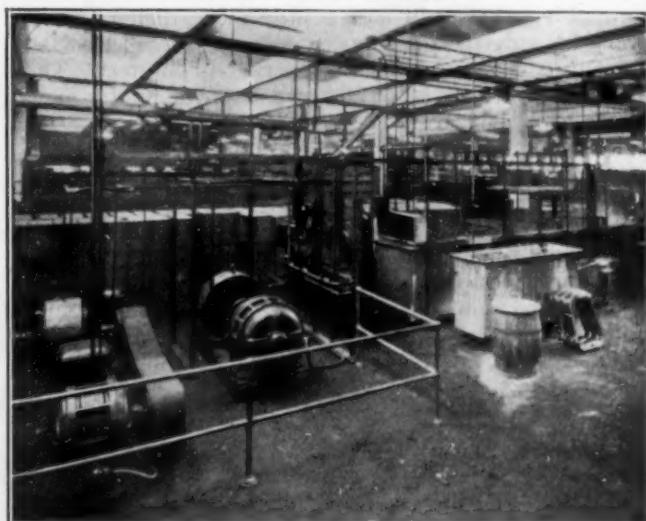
THE PLATING ROOM AND CONVEYOR PLATING TANKS
